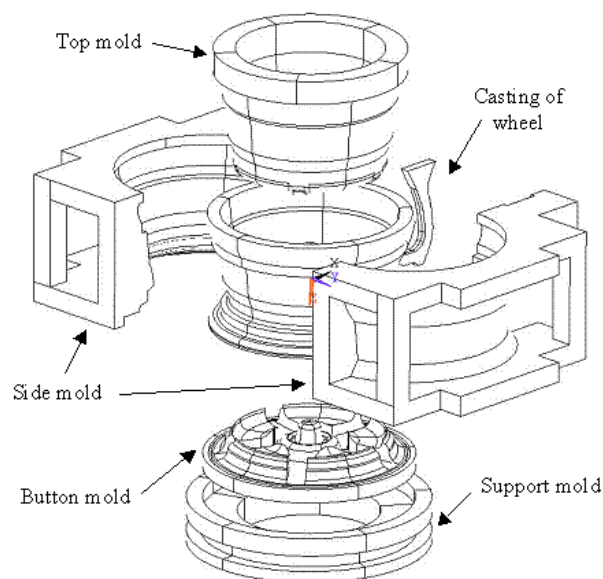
CAD models of casting molds for an aluminum disc wheel [22].
